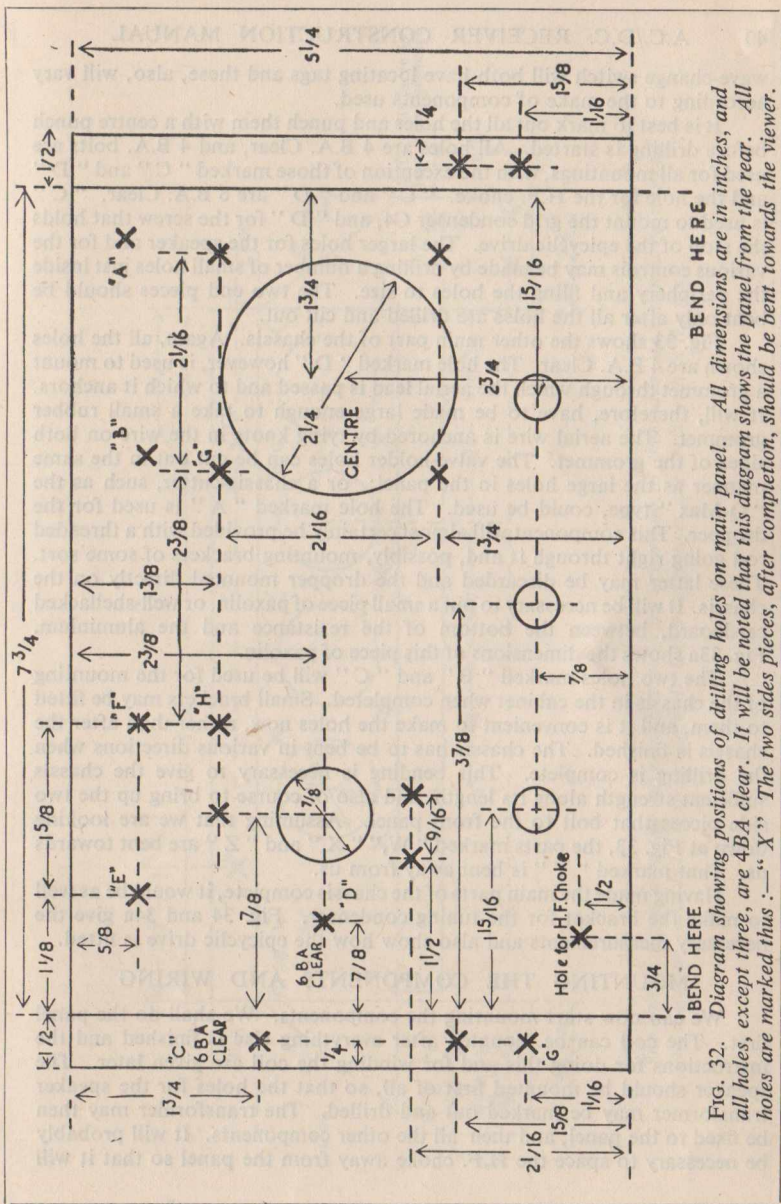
Diagram showing positions of drilling holes on main panel. All dimensions are in inches, and all holes, except three, are 4BA clear. It will be noted that this diagram shows the panel from the rear. All holes are marked thus: "X". The two sides pieces, after completion, should be bent towards the viewer.
